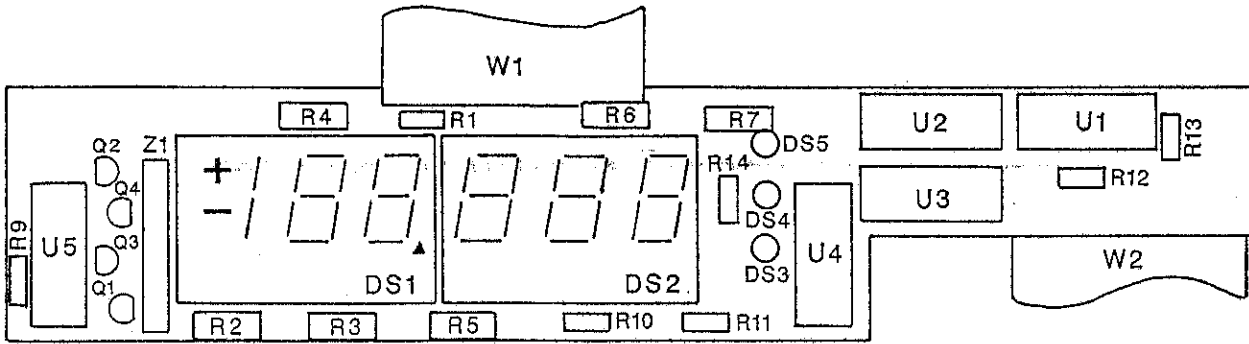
360° Display Circuit Card Assembly A2, Parts Location Diagram
